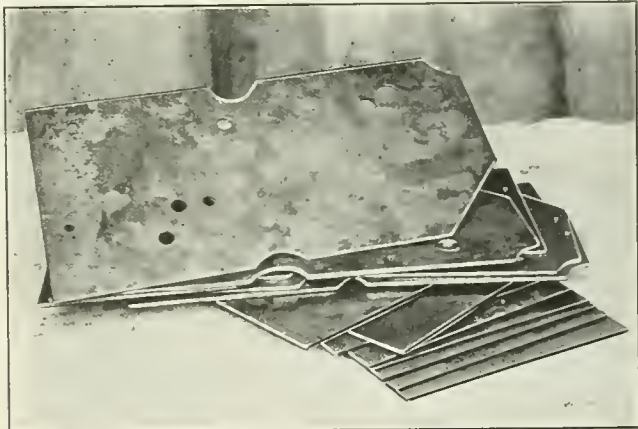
Set of Mask Plates used for Locating the Holes to be drilled in Each Operation on the Side Frame
